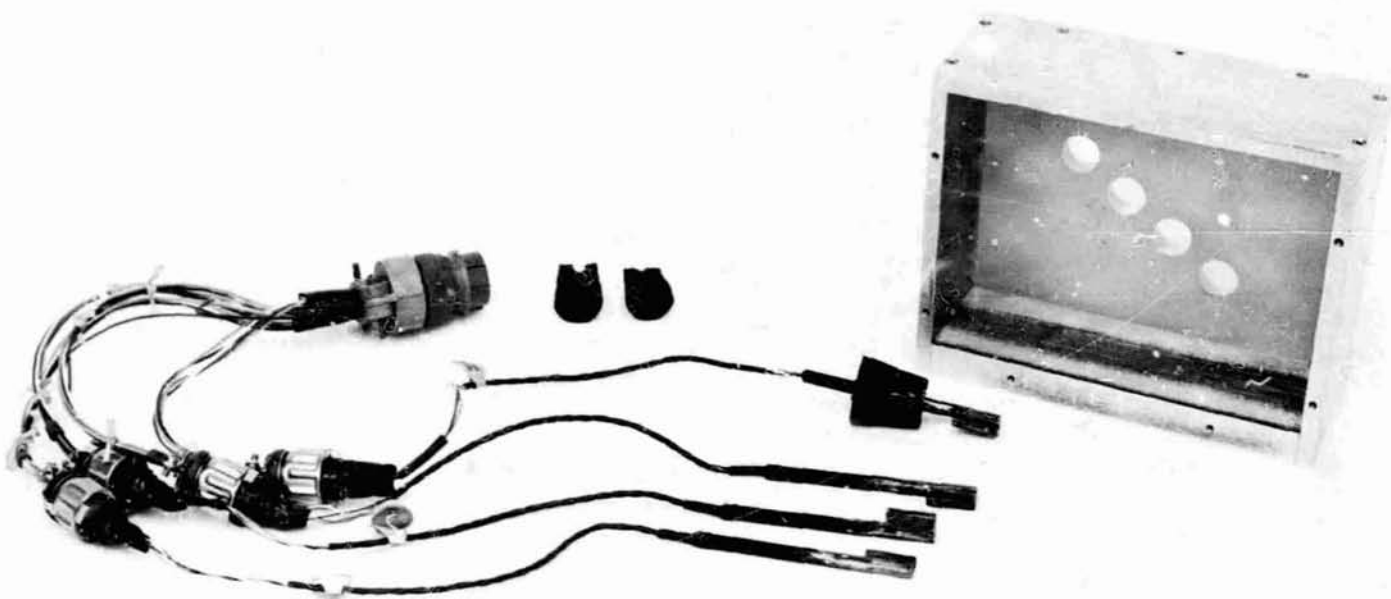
Transducer systems and test mold unassembled prior to foam blowing
